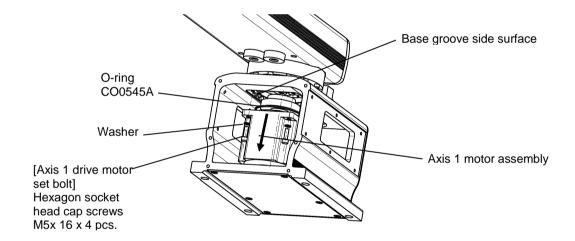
Dismounting axis 1 motor assembly (KHL-500, KHL-600, KHL-700)
